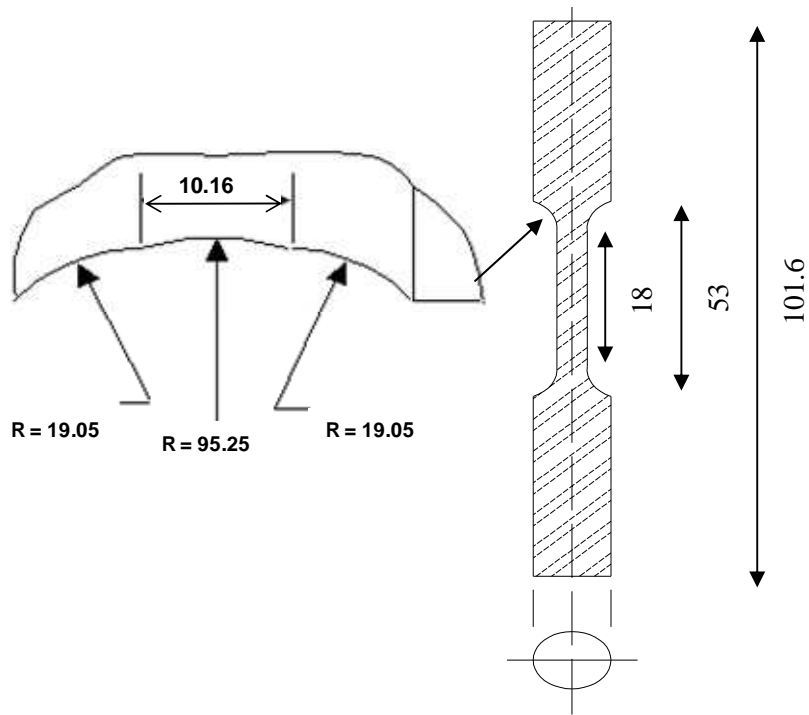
Smooth specimen geometry of SAE 1045 steel (all dimensions are in mm)
